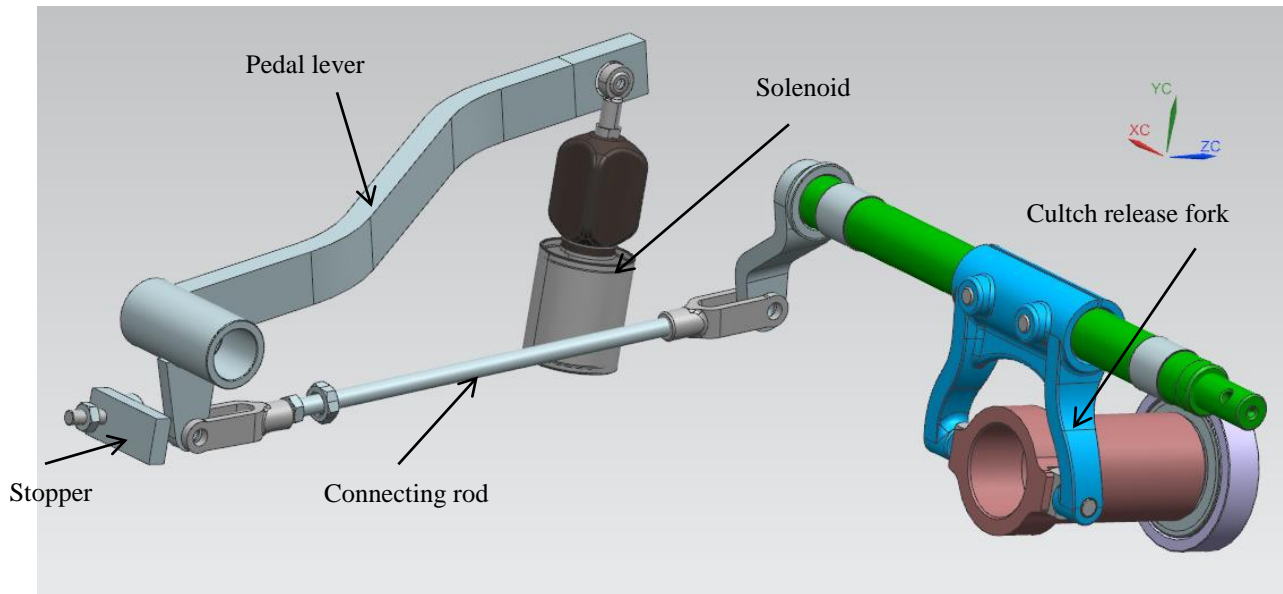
3D CAD model of clutch release fork with solenoid
